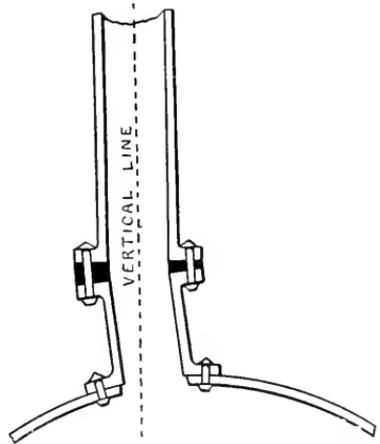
ILLUSTRATING THE USE OF A "DUTCHMAN."
